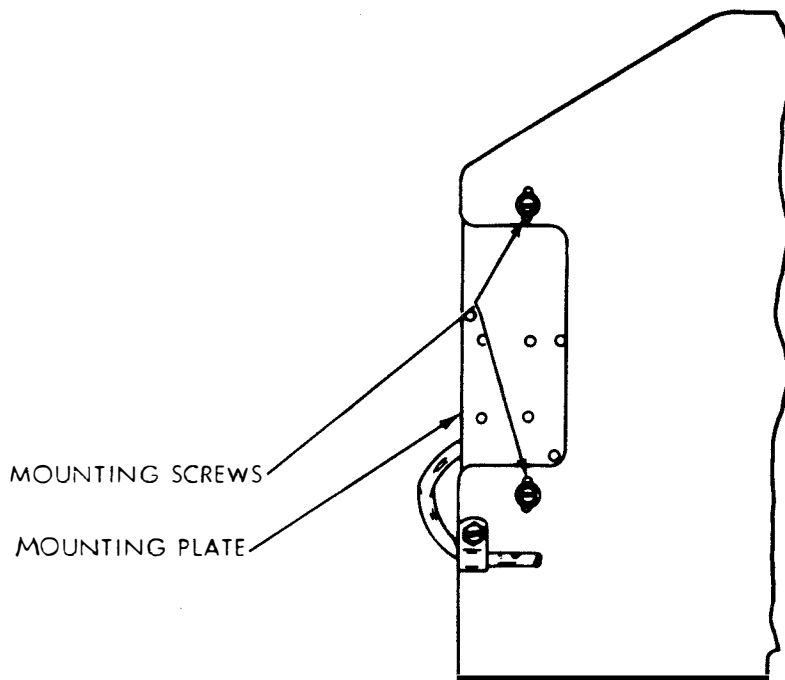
Switch Mechanism Mounting Plate - Left Side View
